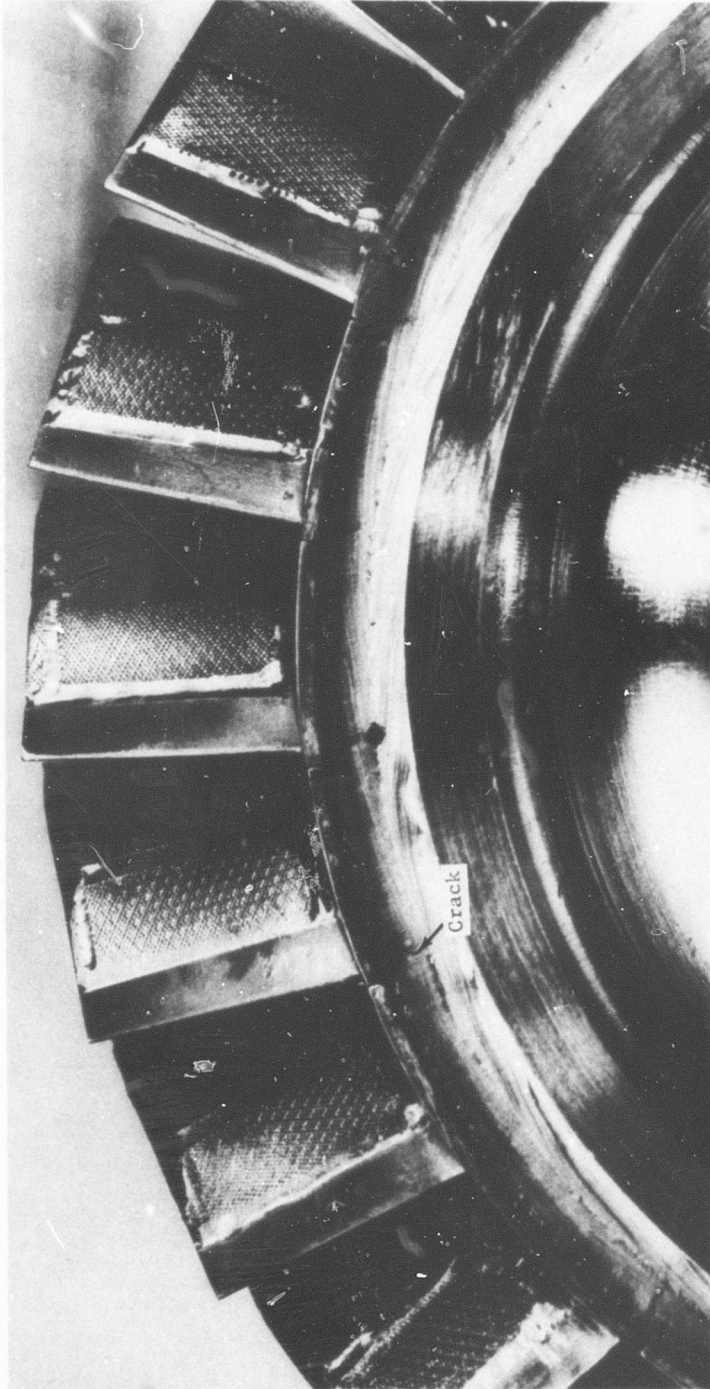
View of Blade-to-Disc Weldment Showing Blade Interface Extensions.
